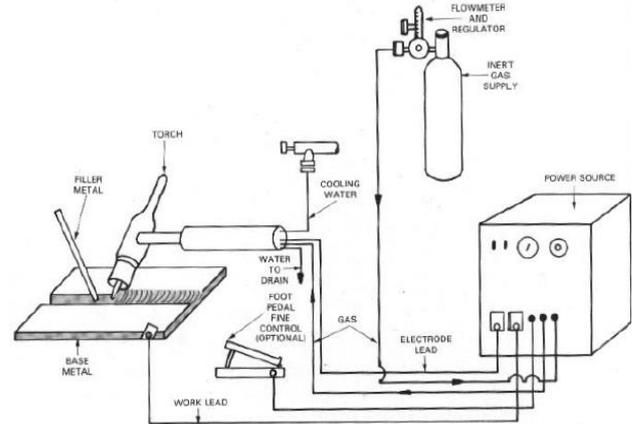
Construction, Working and Process of A-TIG Welding
